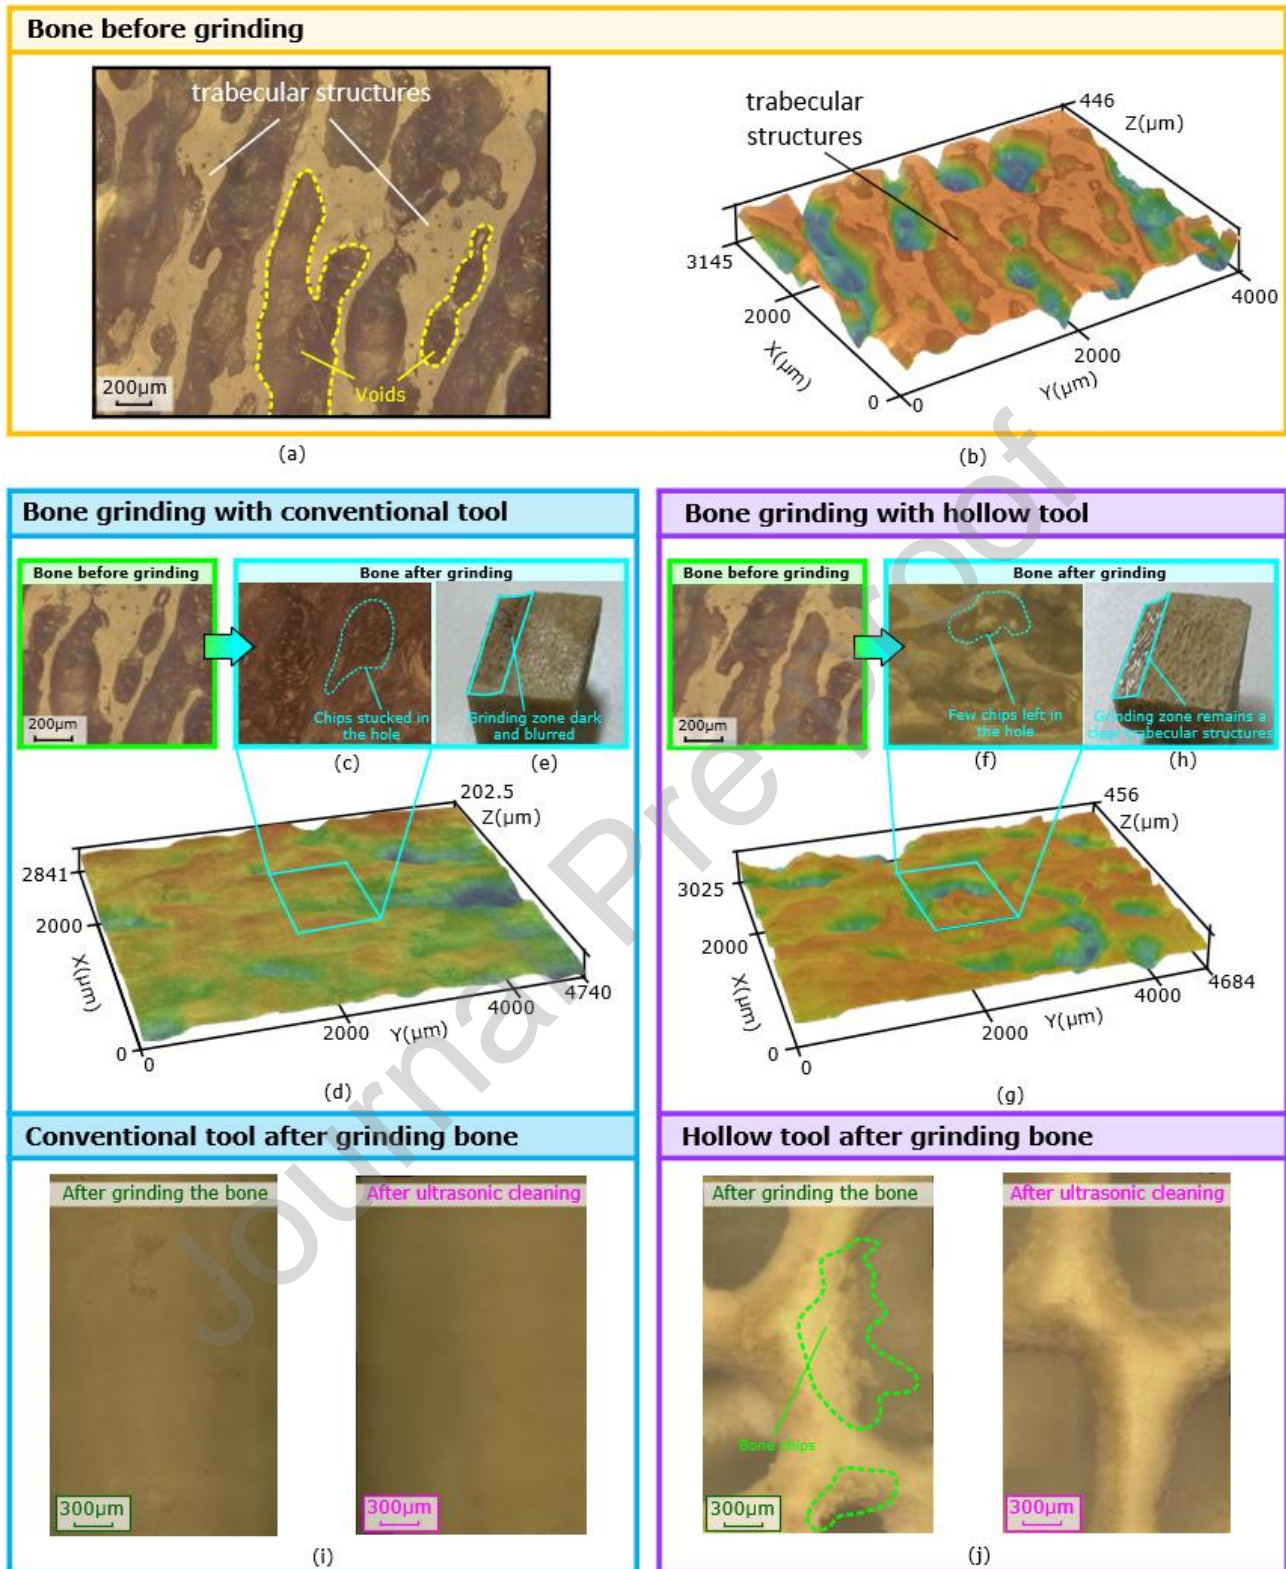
Comparison of the surface texture for the bone grinded with conventional solid grinding tool and hollow grinding tool: (a) 2D and (b) 3D morphology of the real bone before grinding using the 3d profilometer; (c) 2D, (d) 3D morphology and (e) real picture of the grinded bone using conventional solid grinding tool; (f) 2D, (g) 3D morphology and (h) real picture of the grinded bone
